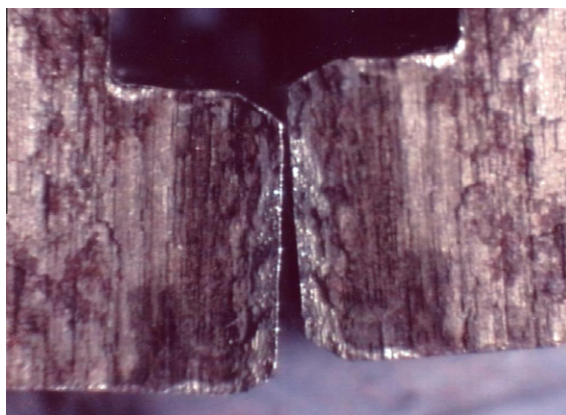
Fracture surfaces of the failed bolt at about 7× magnification, showing yellow zinc deposits on the outer edges of the bolt head.
